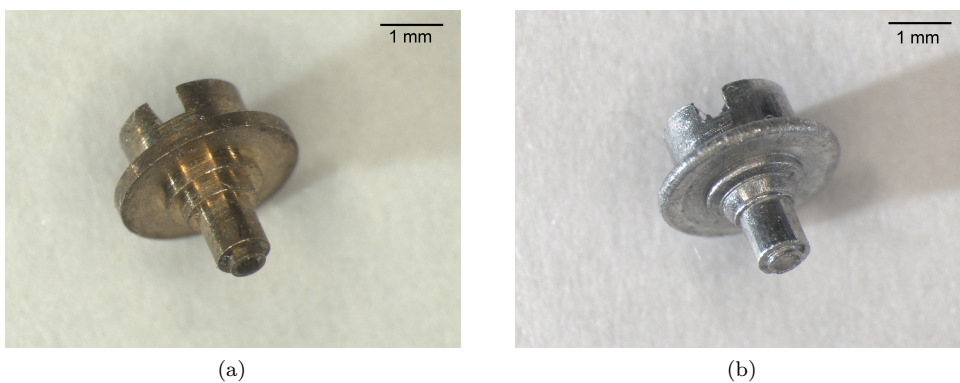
Machine brass axle component (a) and the micro bulk formed aluminium axle realized in this work (b).
